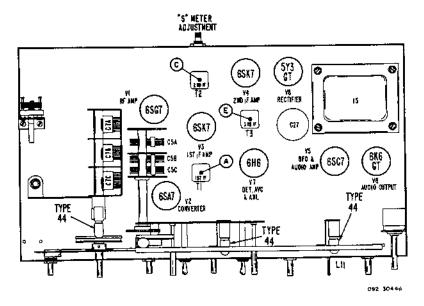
Tap View Chassis Tube Locations And Alignment Points
